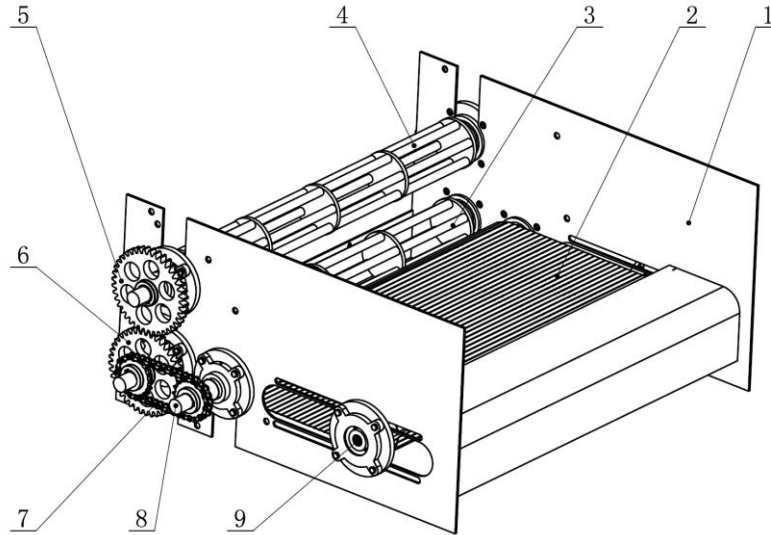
Structure diagram of conveying and feeding flattening mechanism. 1: Body frame; 2: Conveyor chain plate; 3: Lower feed flattening roller; 4: upper feed flattening roller; 5: upper feed flattening roller transmission gear; 6: lower feed flattening roller transmission output gear; 7: Transmission chain; 8: Transmission chain plate driving shaft; and 9: Conveyor chain plate movable shaft
